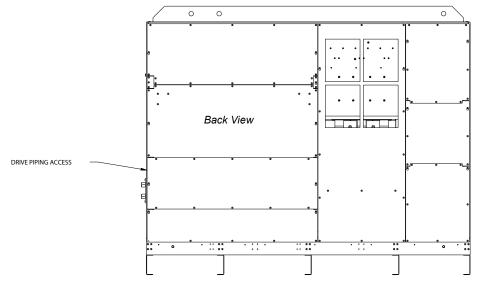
Drive cabinet dimensions: Frame 4 (dimensions in inches)^(a)
